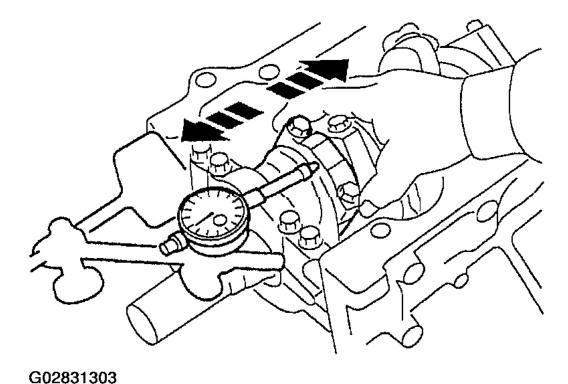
Measuring Connecting Rod Large End Side Clearance Courtesy of MAZDA MOTORS CORP.
